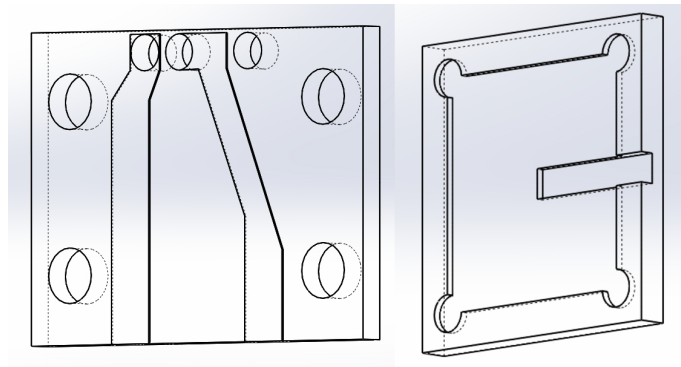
PCB design and sensor frame designs of second iteration sensor holders
